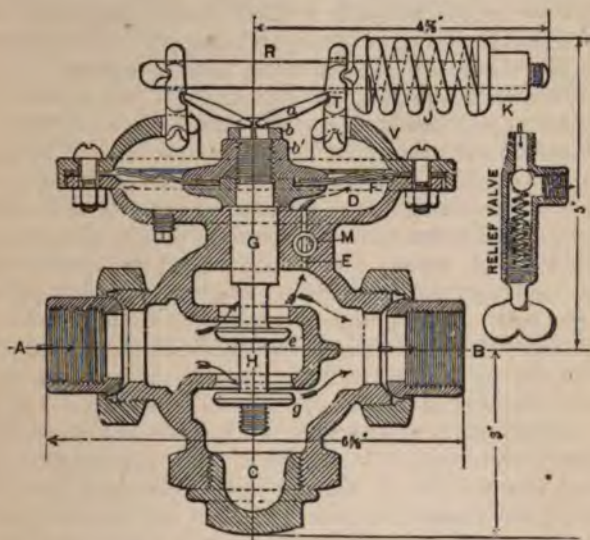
Valve made by Messrs. W. H. Bailey & Co. for reducing the pressure of Steam, from that of the service, to what the Engine, or other apparatus, can conveniently handle. The Steam is throttled in passing through the Valve, issuing at a lower pressure.
